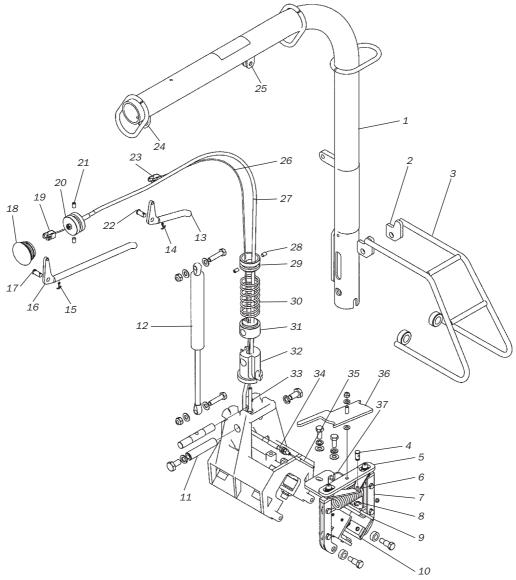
Exploded Assembly (with Type II Brake System)
